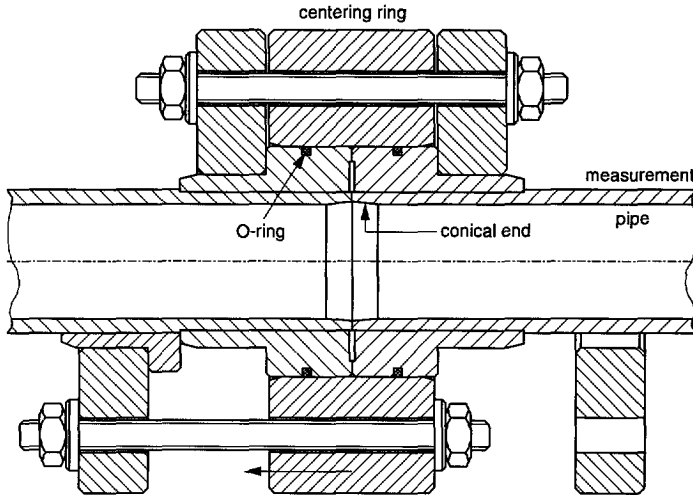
The design of the pipe connection which centers the two pipe ends at the inner diameter of the pipe and assures a flush connection and a good watertight sealing. The top half of the figure shows the connection under mounted conditions. In the bottom half the split flange is shown which allows movement of the centering ring with the use of the threaded ends.
